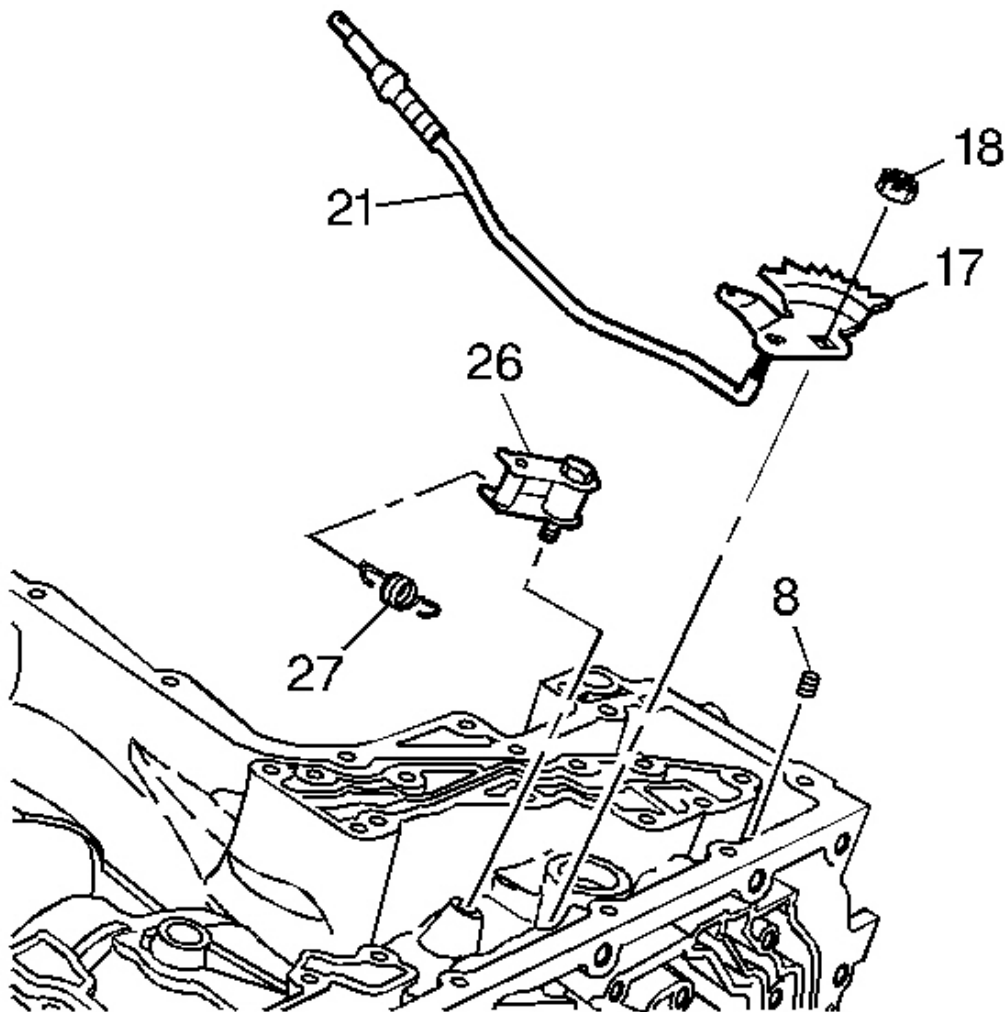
Locating Detent Lever, Actuator Rod & Manual Shaft Nut
